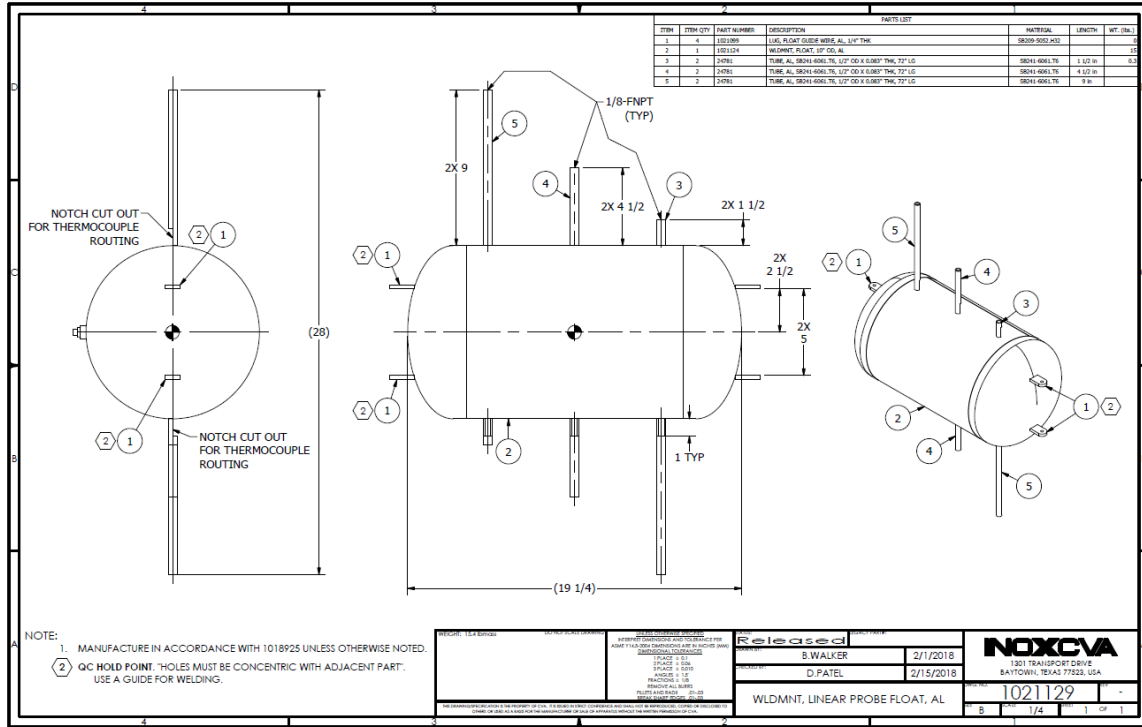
Additional Detailed Drawing of Central Float Design (provided by CVA)
